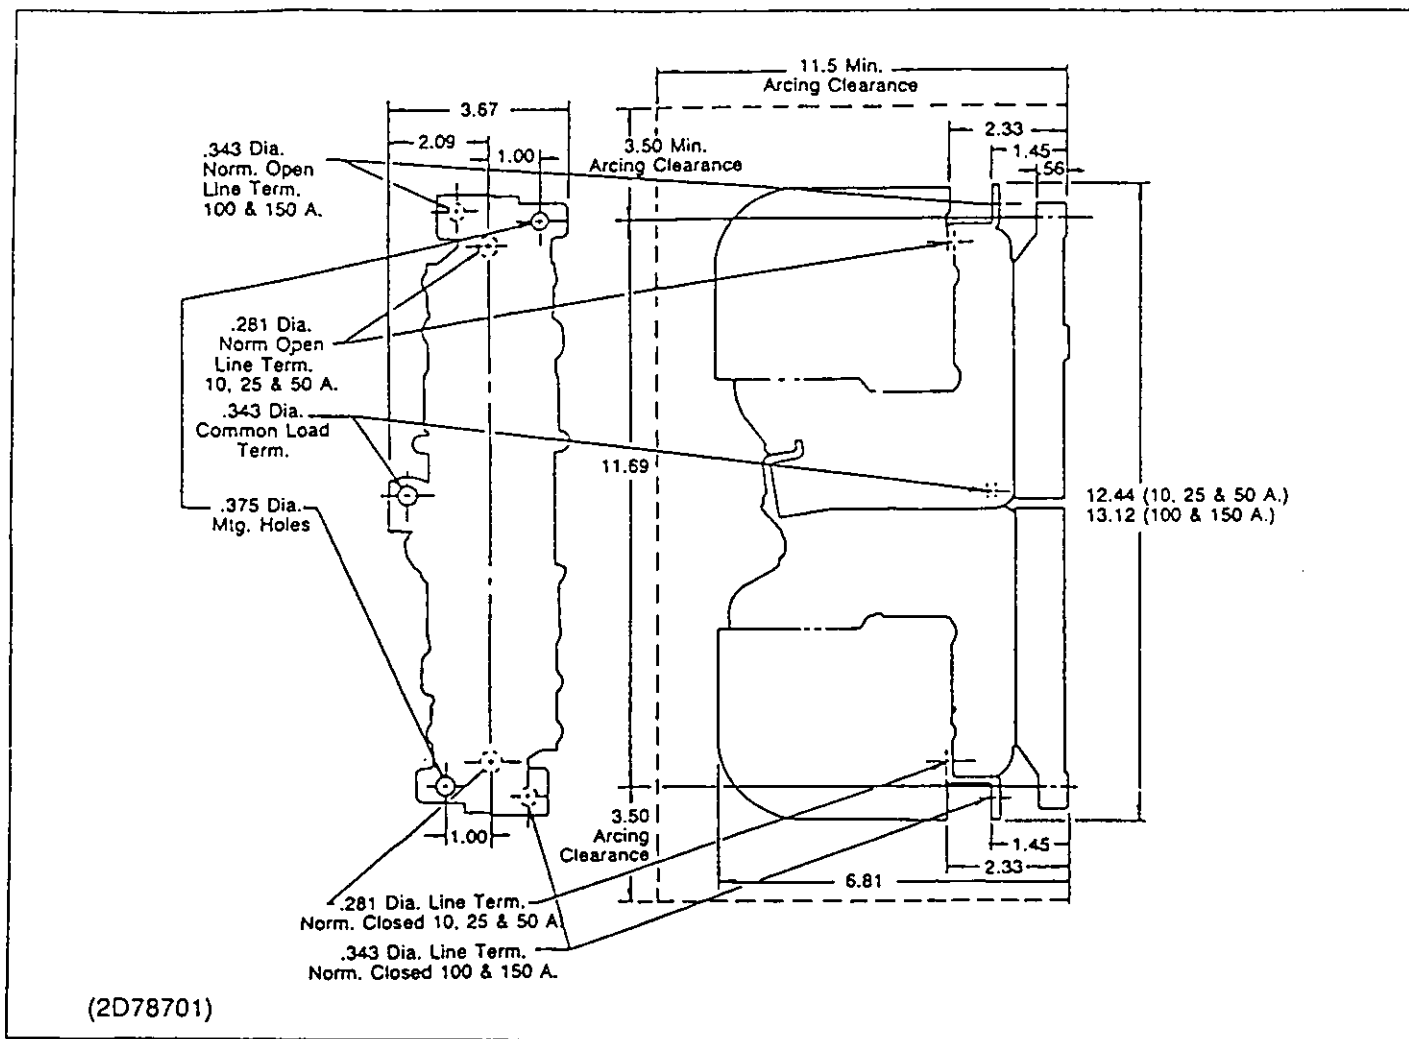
Dimension Drawings (Dim in inches) of 1 NO/1 NC Pole MME Contactor
